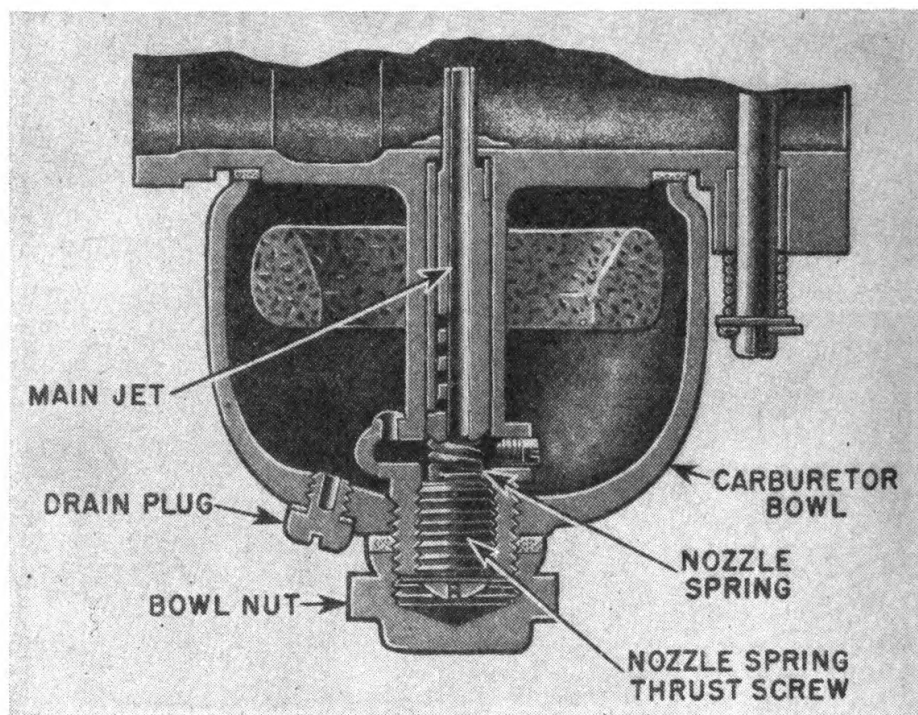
Cutaway view showing nozzle spring thrust screw.
